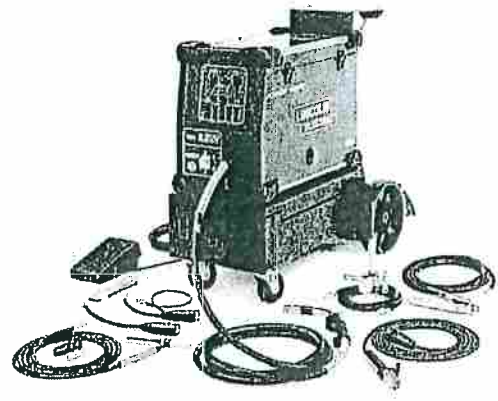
Power Wave® C300 Inverter Type Welder
